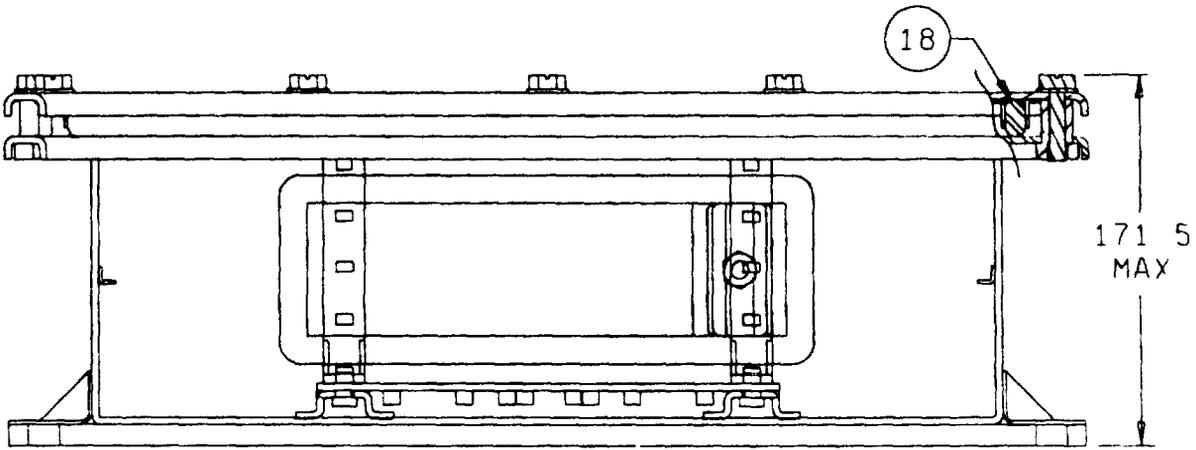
Enclosure assembly, M24728/3-001 and M24728/3-004
